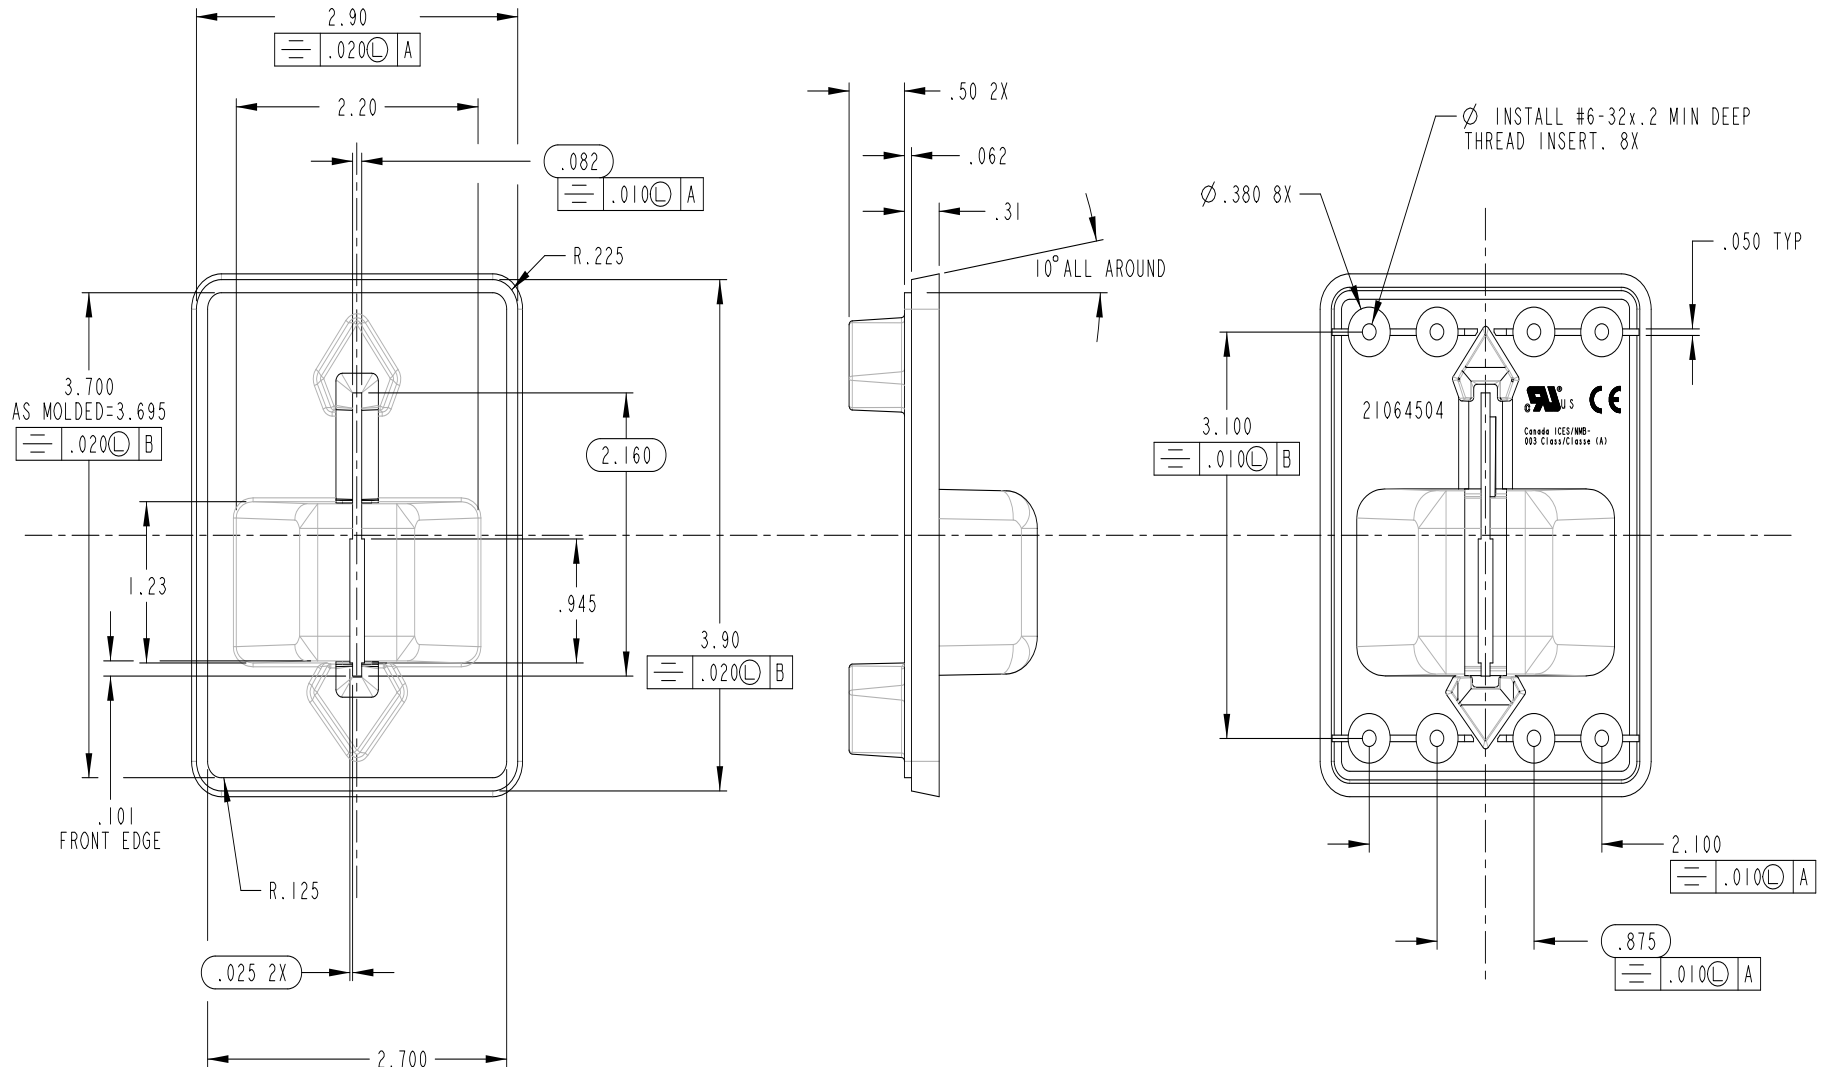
Dimensions for Extended Bezel Design Sheet 1
